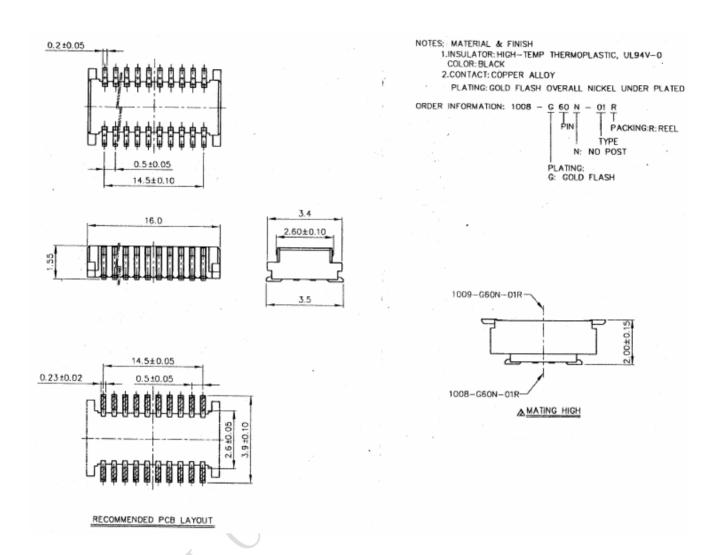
ENTERY 1008-G60N-01R board-to-board connector
